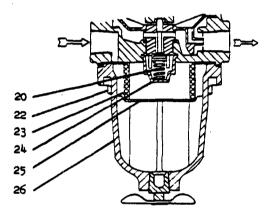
PARTIAL ASSEMBLY OF AF-2 TYPE SHOWING ADDITIONAL PARTS IN FILTER ASSEMBLY.
